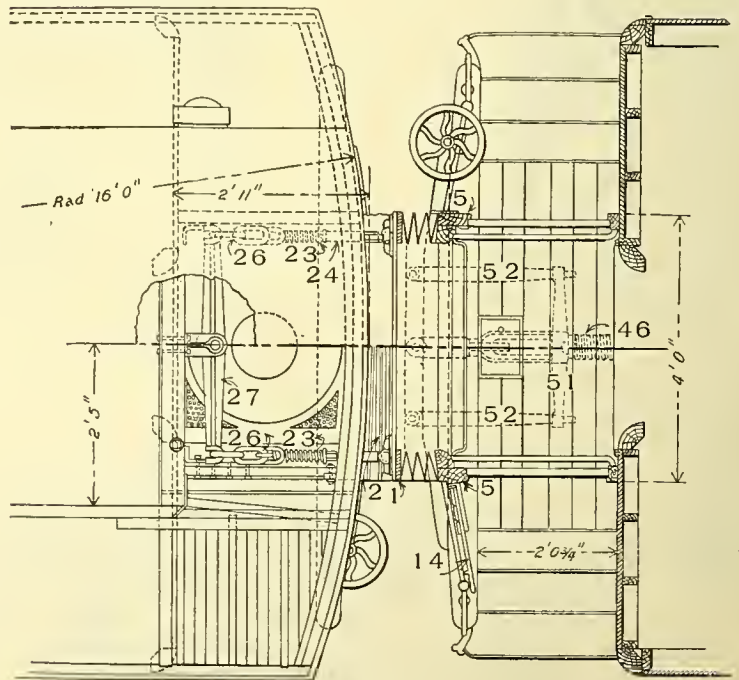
Section Plan, showing Equalizers and Springs for the Adjustment of Face-plates.
